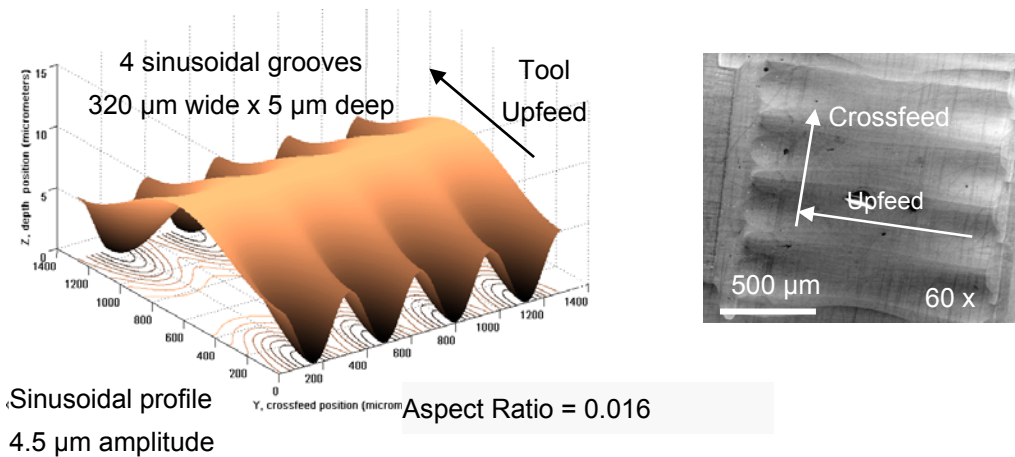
"Potato chip" part consisting of grooves with sinusoidal profile in the upfeed direction and sinusoidal groove cross sections. (left) Part design (right) SEM image of part made in hard-plated copper using 1 mm nose-radius tool.
